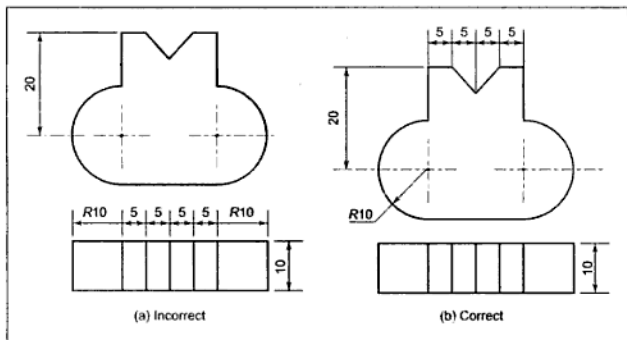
Dimensions to be Placed in Views which Show Relevant Features
